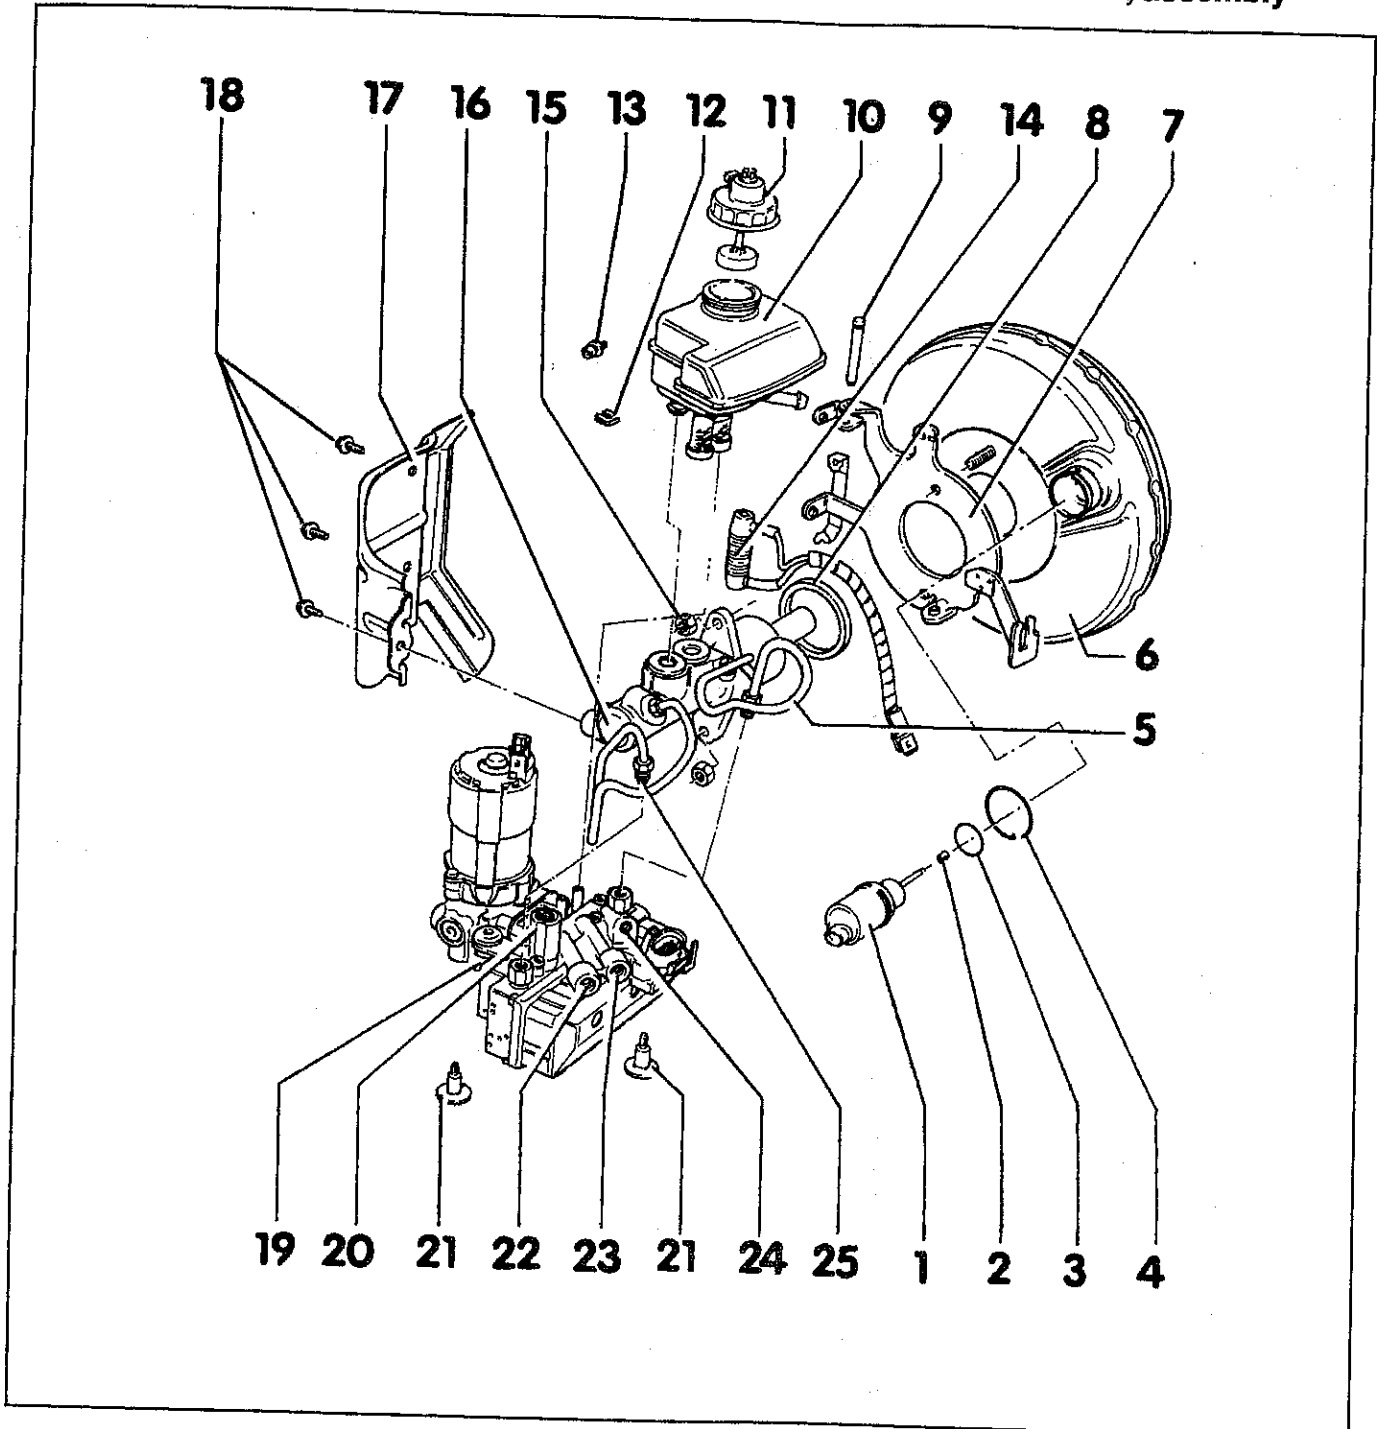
Exploded view of the Teves 04 ABS/EDL unit.
